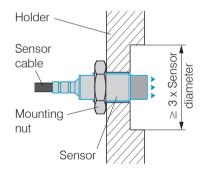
Flush mounting of an unshielded sensor in a metal holder
